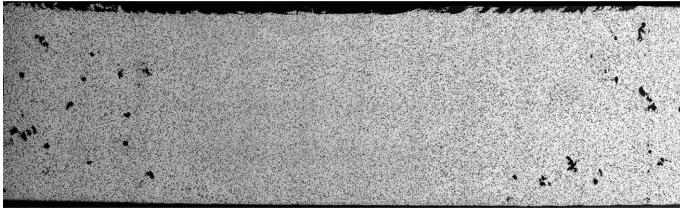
FSW weld structure. Welding parameters: no. 1 of Table 3
